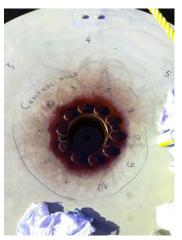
Critical places on the top holder for blades after spraying penetrant-evaluation of surface irregularity
